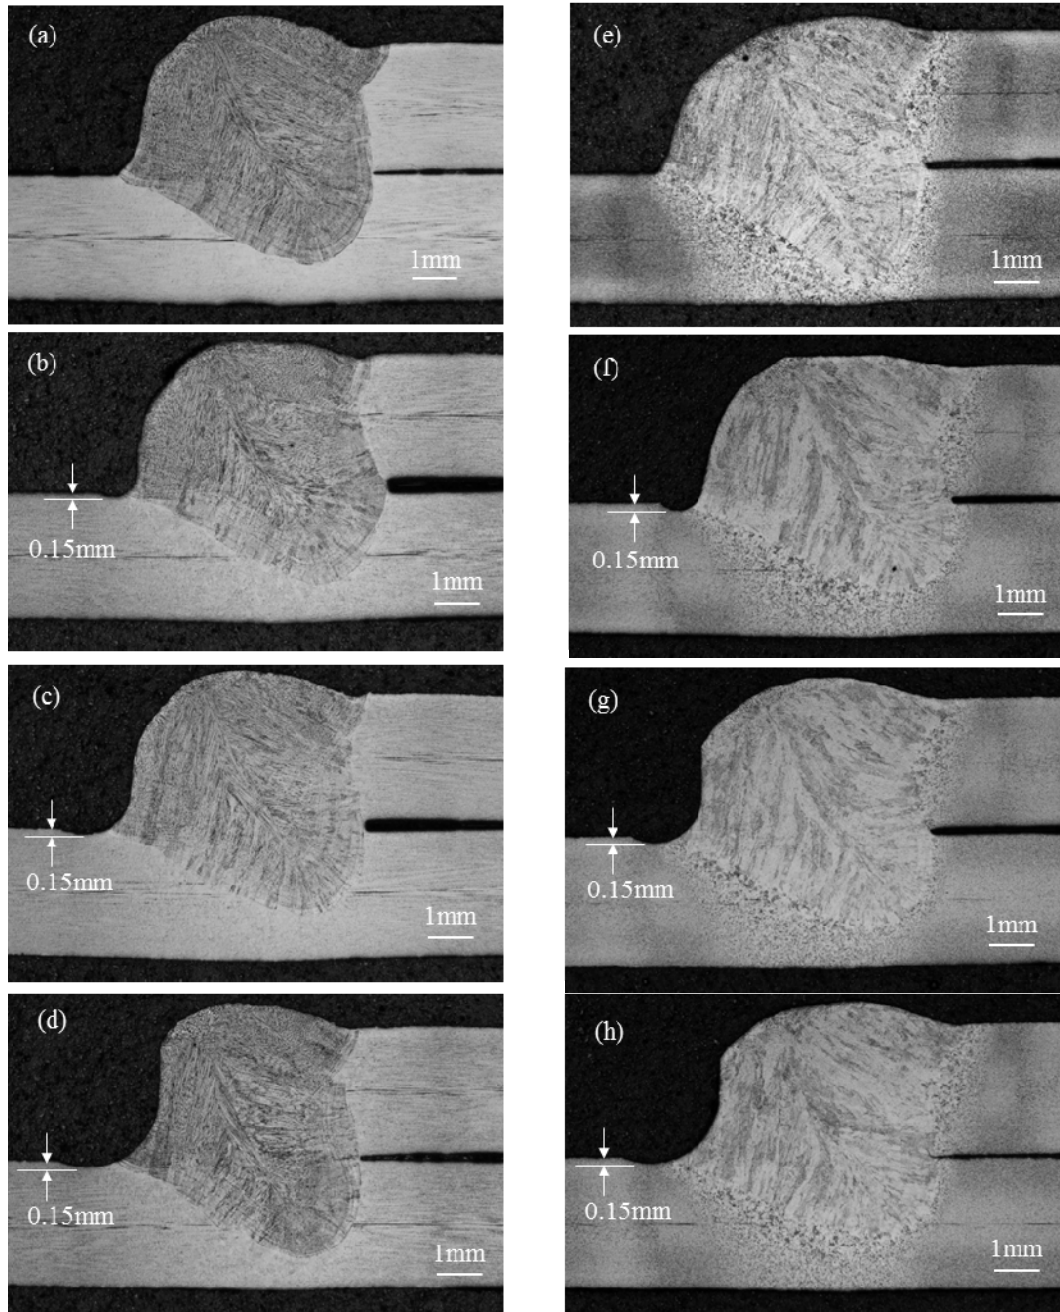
Cross-sections around weld toes of as-welded joint and toe machined welded joints. (a) As-welded joint of 440FP, (b) toe machined welded joint of 440FP with toe radius of 0.5 mm, (c) toe machined welded joint of 440FP with toe radius of 1.0 mm, (d) toe machined welded joint of 440FP with toe radius of 1.5 mm, (e) As-welded joint of 980B, (f) toe machined welded joint of 980B with toe radius of 0.5 mm, (g) toe machined welded joint of 980B with toe radius of 1.0 mm, (h) toe machined welded joint of 980B with toe radius of 1.5 mm.
